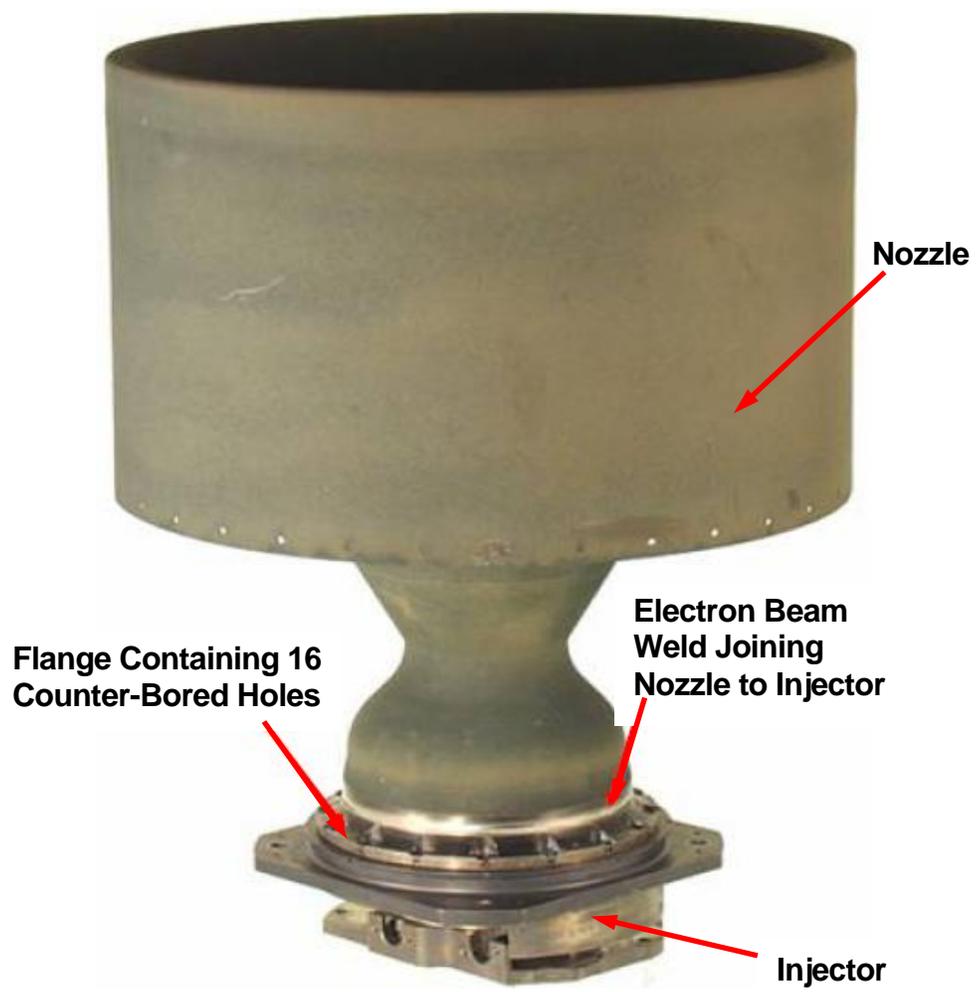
RCS thruster, showing major components: injector and nozzle.
